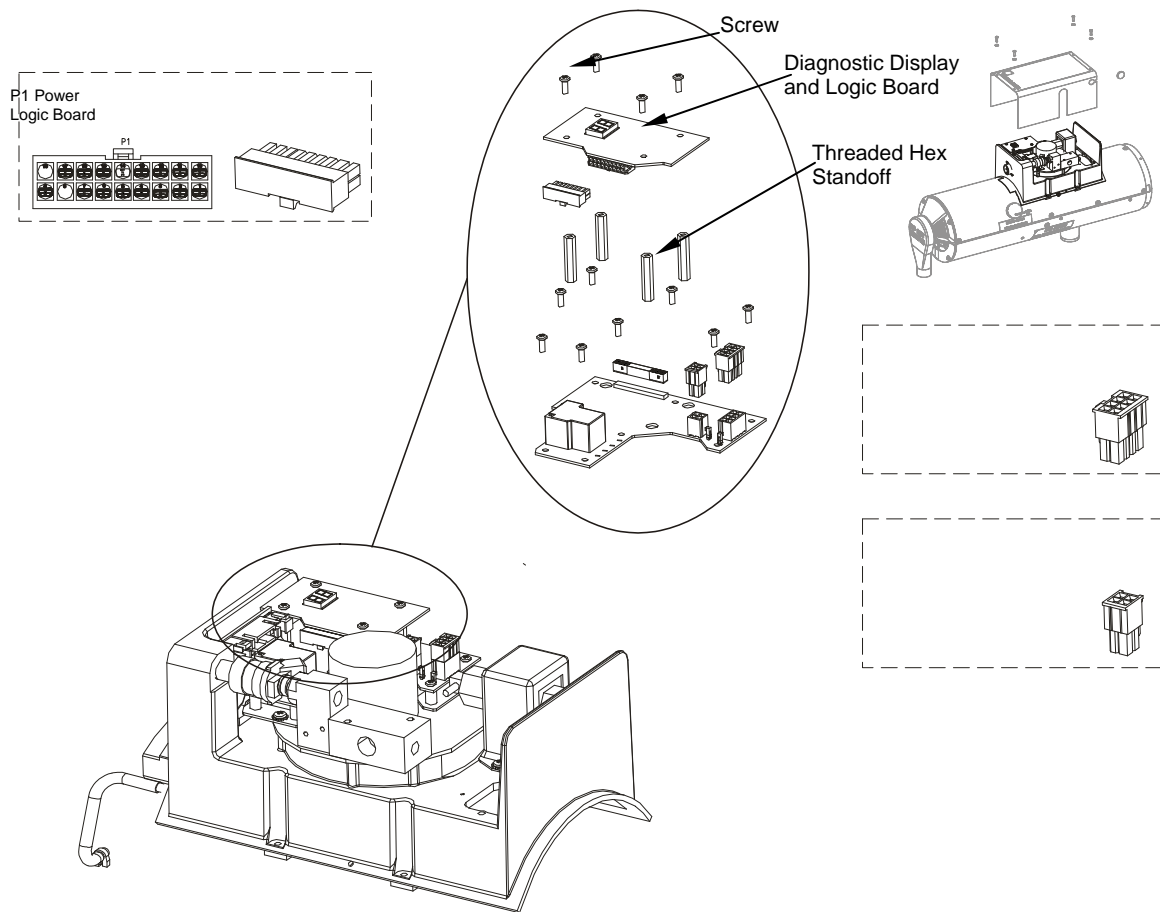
Burner Fan Driver Board. Design Iteration 3
